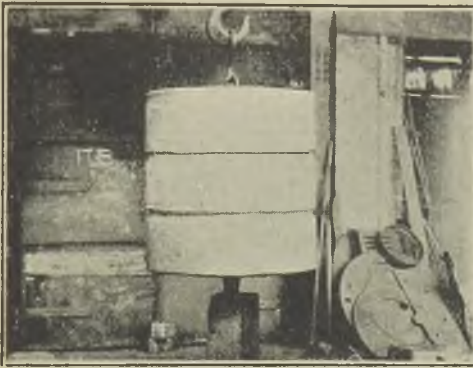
THE DRIED CORE READY FOR ASSEMBLING.
